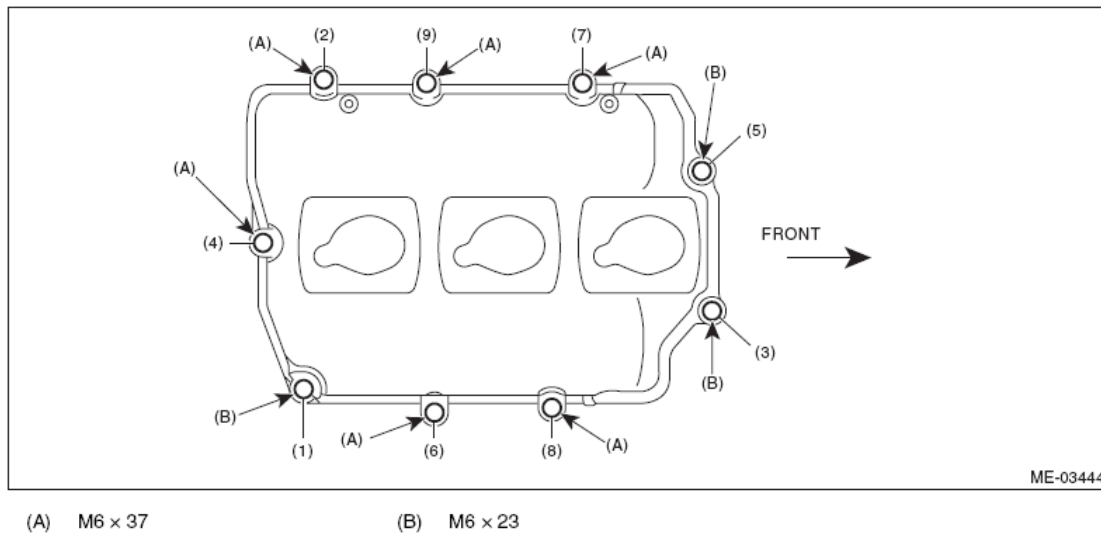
Identifying Camshaft Mounting Bolt (RH Side)
